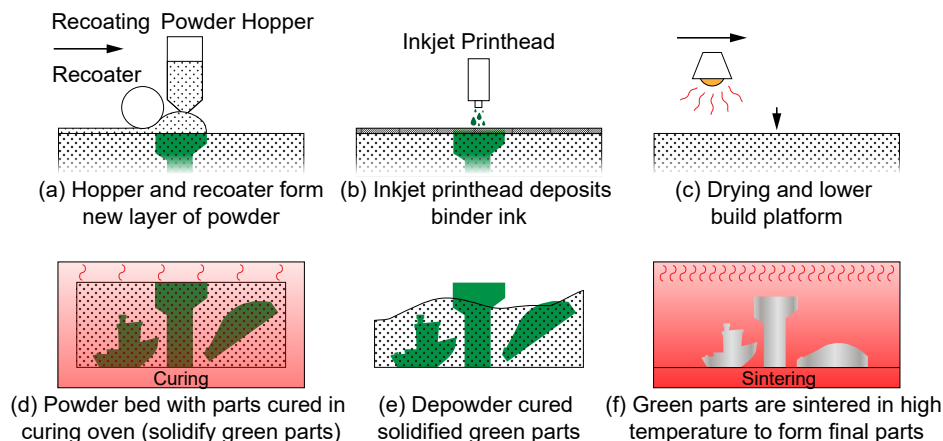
Metal binder jetting (MBJ) 3D printing process.
